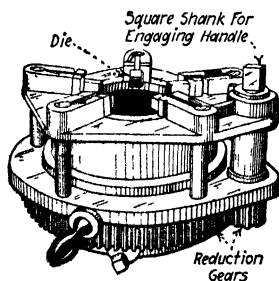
Ratchet stock-and-die, with reduction gears, for threading conduit of large size. See Fig. 155 for power-drive attachment. (*The Toledo Pipe Threading Machine Co., Toledo, Ohio.*)
